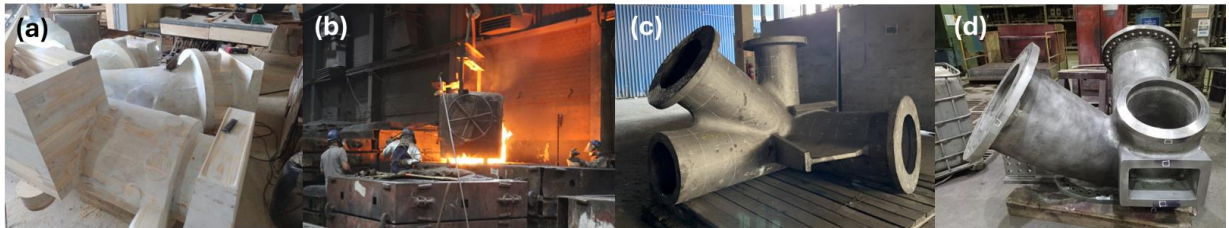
Cast Node Manufacturing: (a) CNC-produced wooden tooling; (b) steel poured into sand mold; (c) as-cast geometry prior to machining; (d) final cast node design incorporating precision-machined weld preparations and bolt hole patterns
